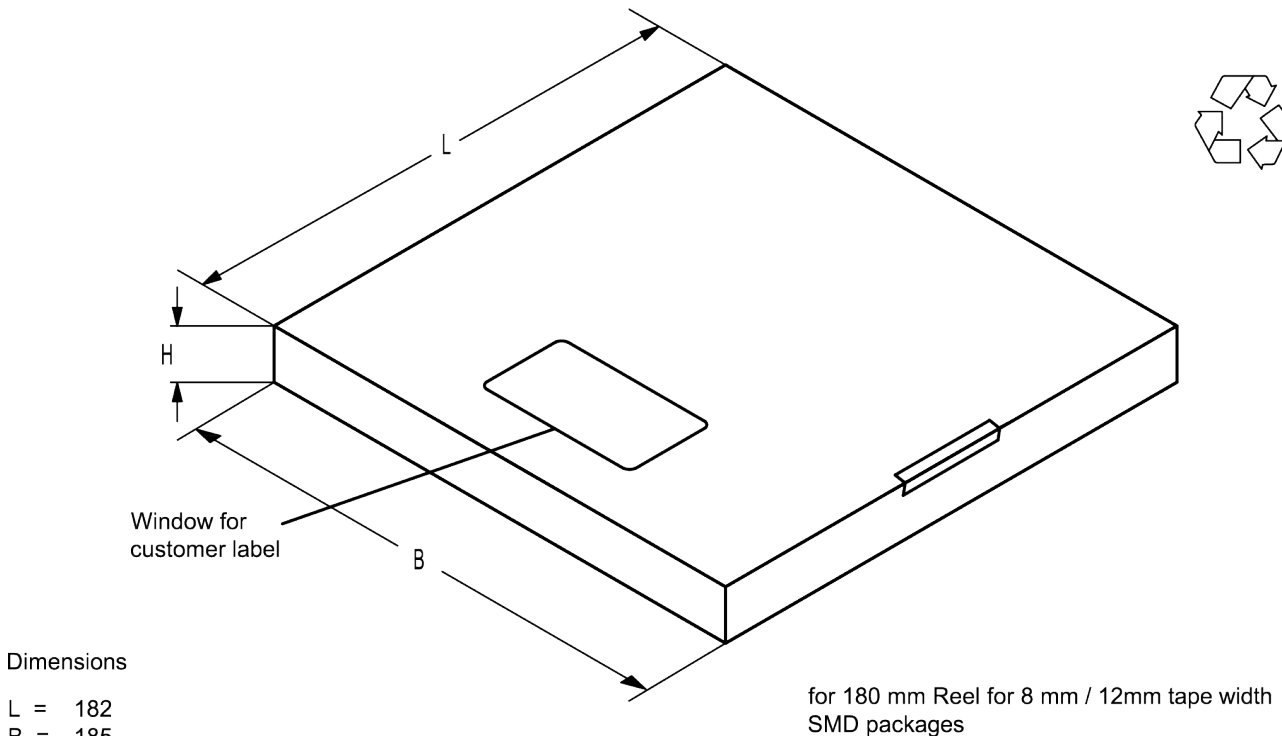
Drawing of folding box for reel with diameter of 180 mm.
